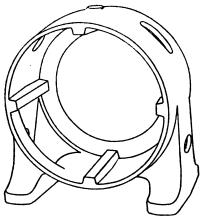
PERSPECTIVE VIEW OF FRAME CASTING IN THE ROUGH
